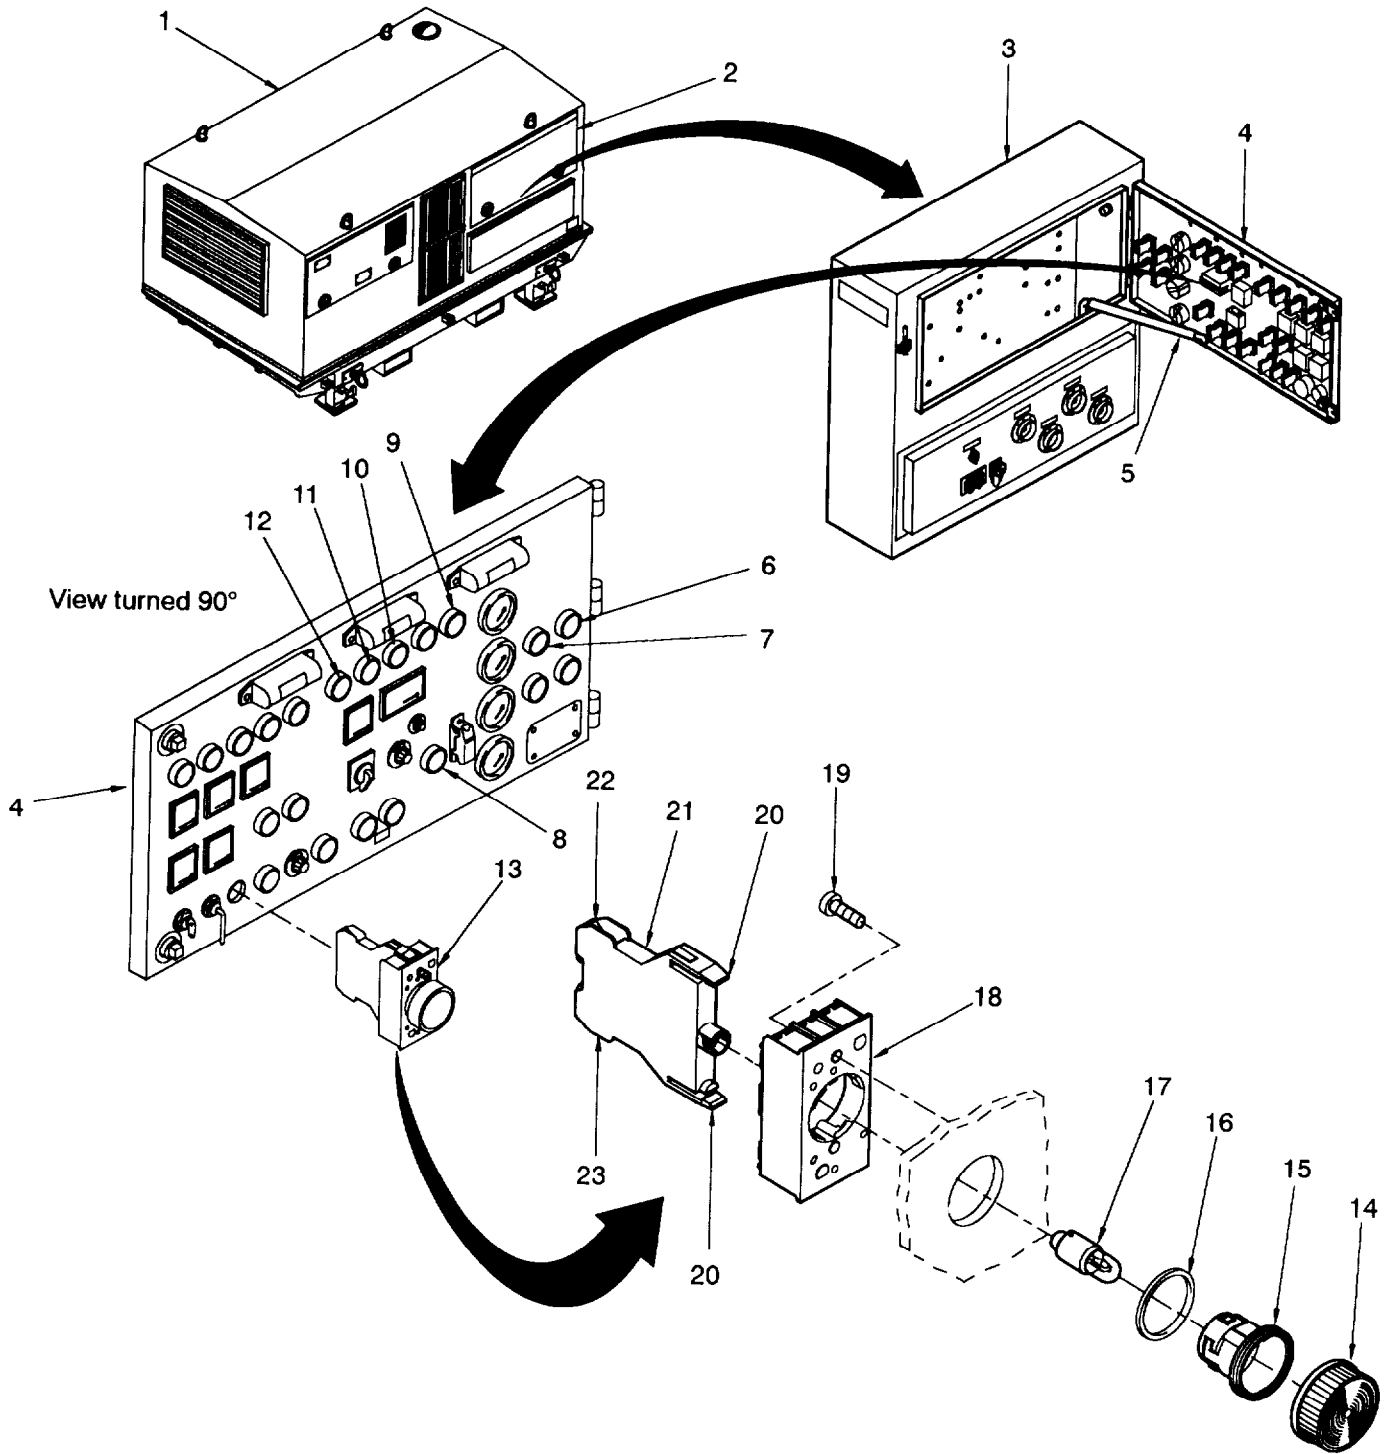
Control Cabinet Assembly, Light Indicator Assembly Maintenance.
